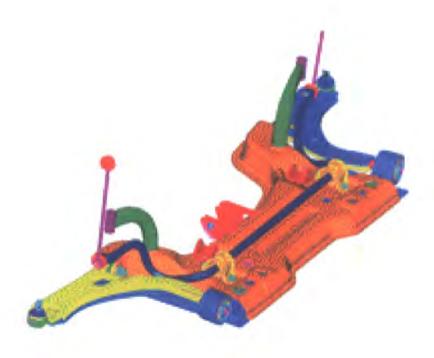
A Steel Pressed and Fabricated Front Suspension Module
